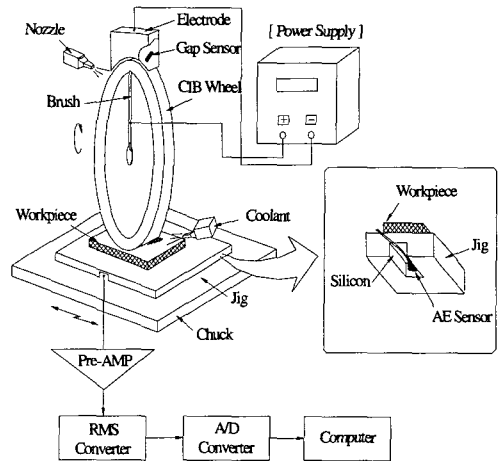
Schematic drawing of electrolytic in-process dressing experimental setup.
